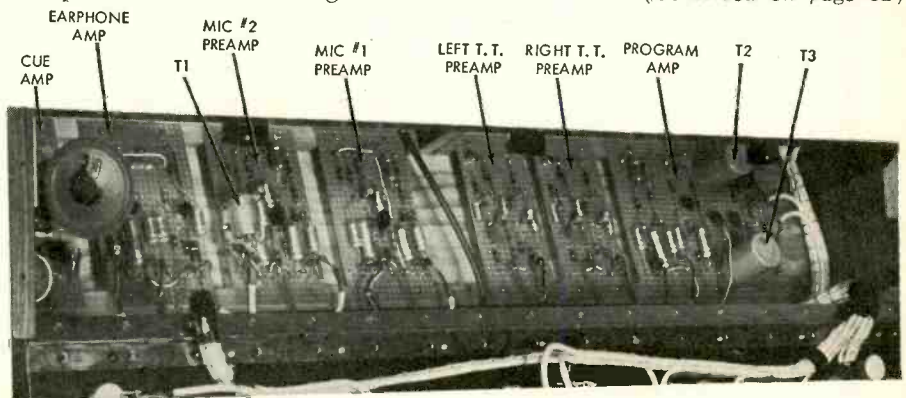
Closeup of the Vector boards showing placement in cabinet.
